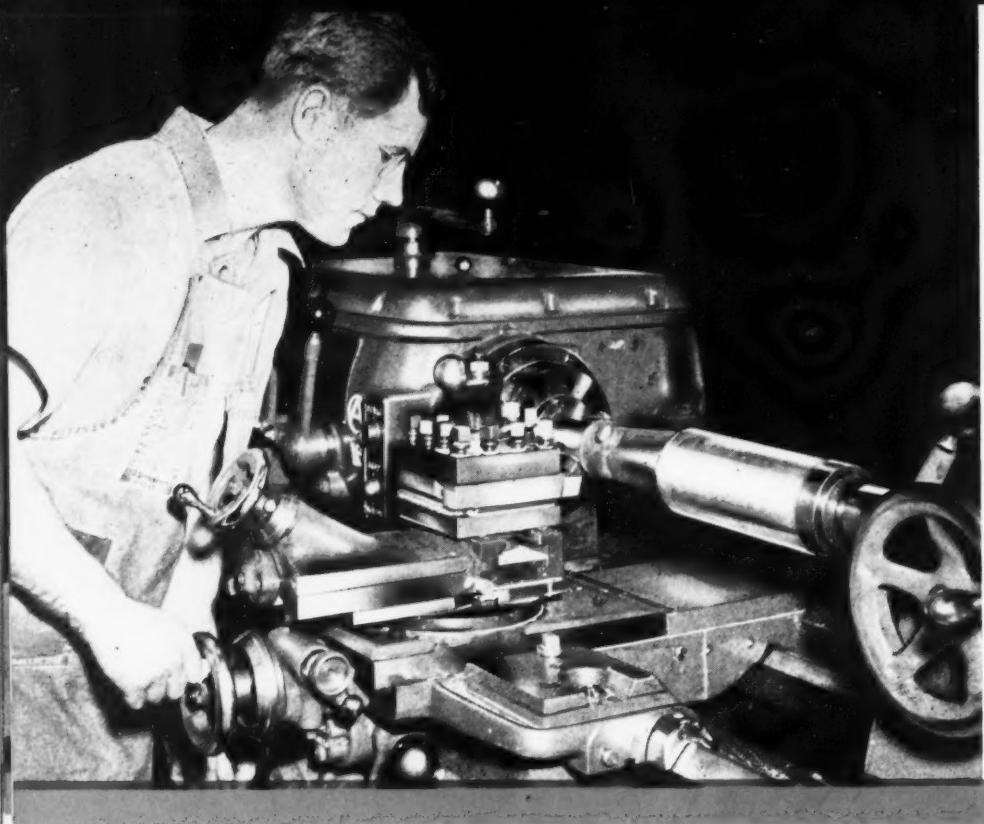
Turning a Piston Assembly for a Tail-wheel Strut after the Part has been Given a Preliminary Rough-turning and been Heat-treated to 350 Brinell
